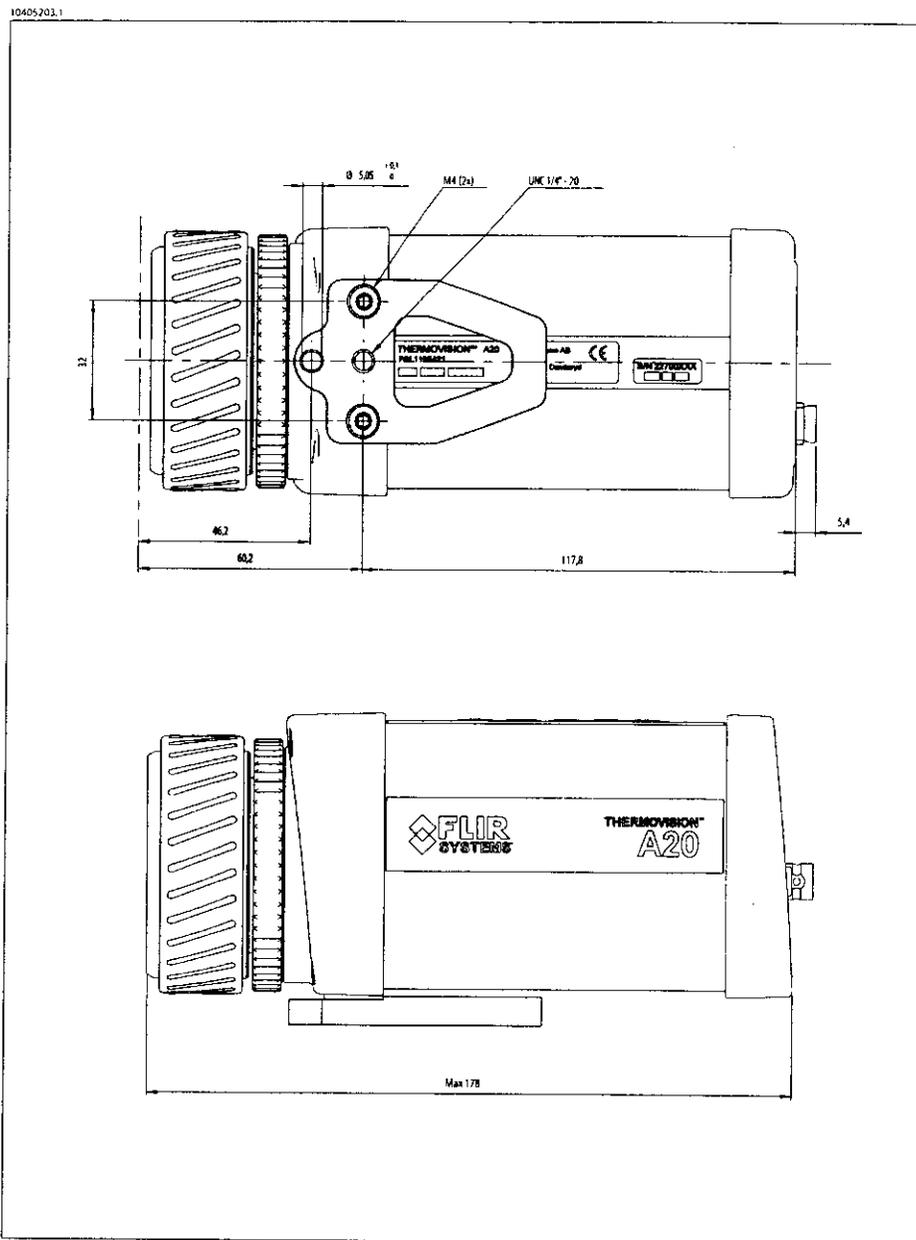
Overall dimensions of the camera, with 45° IR lens
